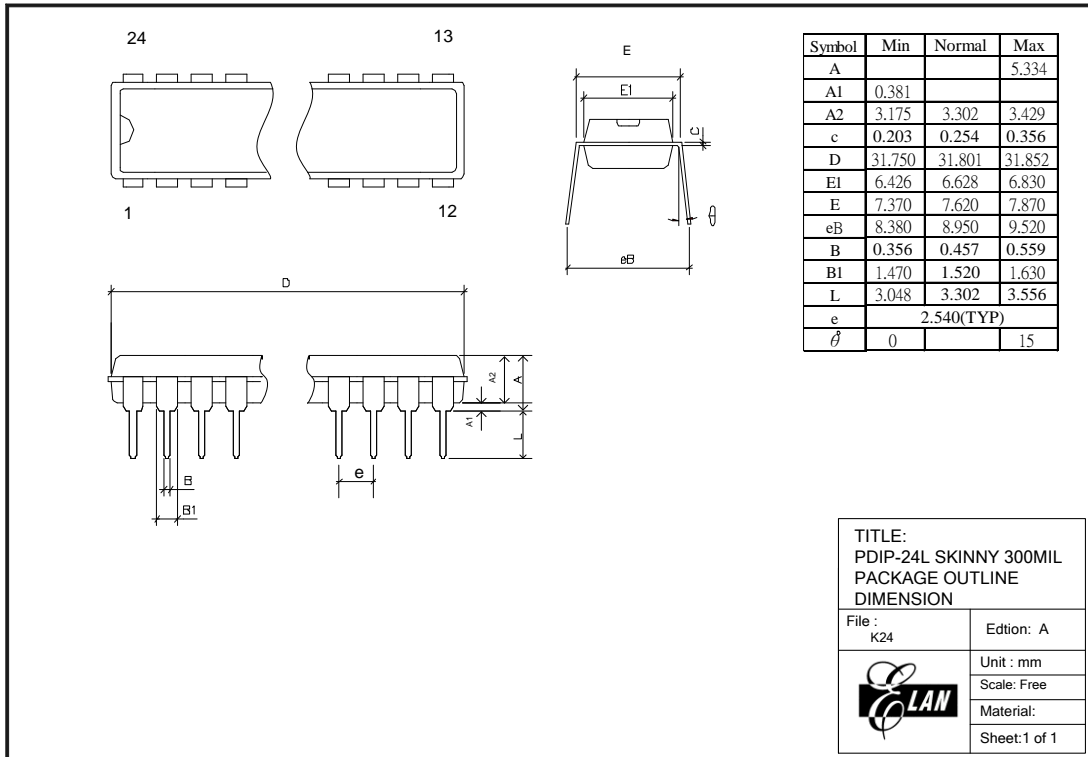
EM78P210N 24-pin Skinny DIP Package Type
